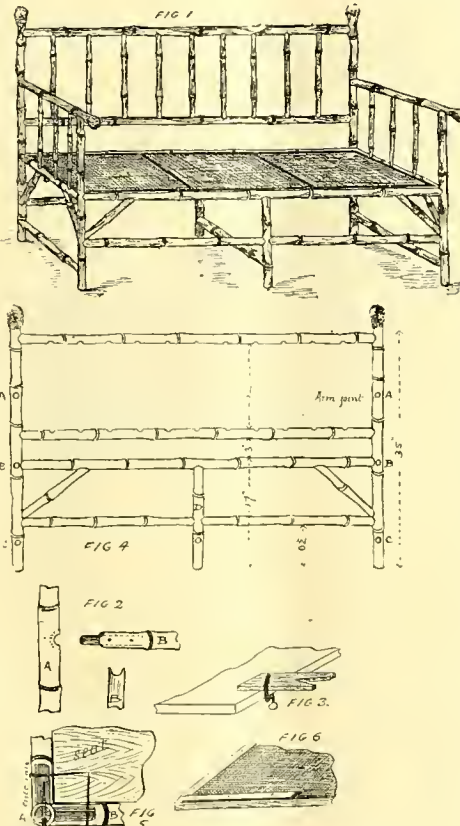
A BAMBOO GARDEN SEAT AND DETAILS SHOWING CONSTRUCTION OF SAME.
